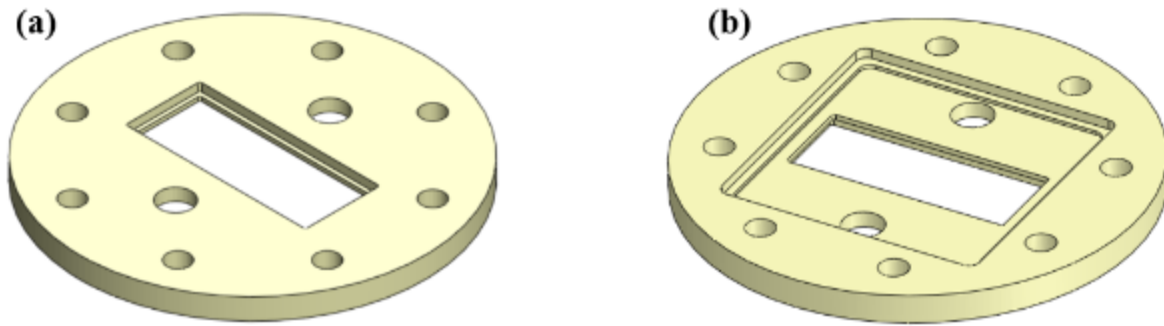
(a) Top view of the CAD model for the manifold support part. The centered rectangular recess is designed to fit the copper manifold. (b) Bottom view of the CAD model for the manifold support part. The top and bottom recess are designed to fit the copper manifold and base, aligning the wick area with the manifold microtubes.
